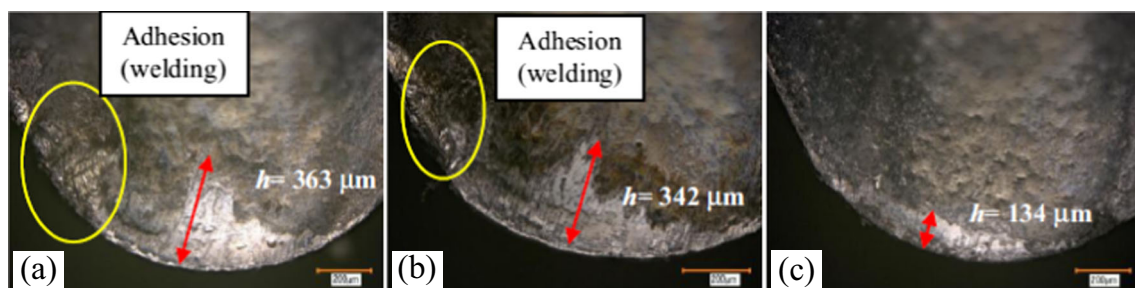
Tool–chip contact length after 1 min of cutting for a dry machining, b MQL machining, and c cryogenic machining [16]
